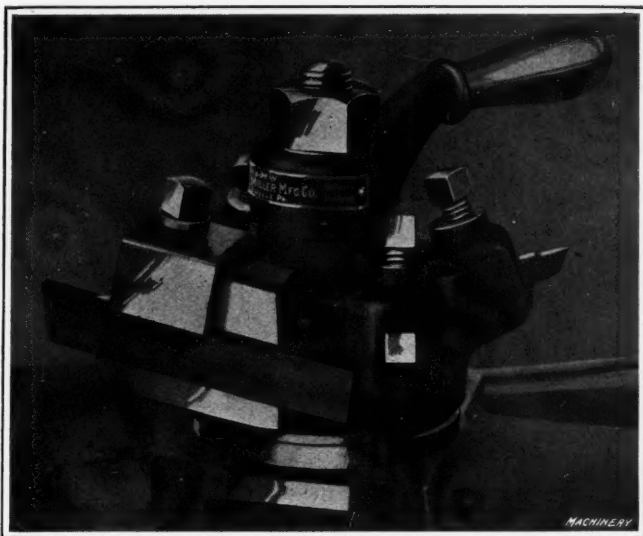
Close View of Style C Turret Tool-holder with Cut-off Tool at Front
